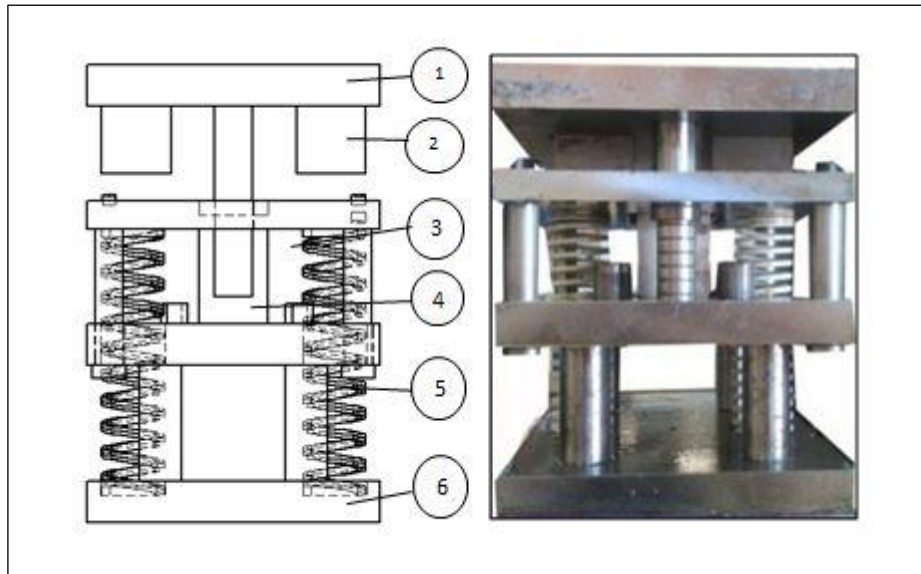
Schematic and photograph for the experimental set-up: 1,upper part , 2, die; 3, blank holder; 4, punch; 5, spring ; 6, lower part.
